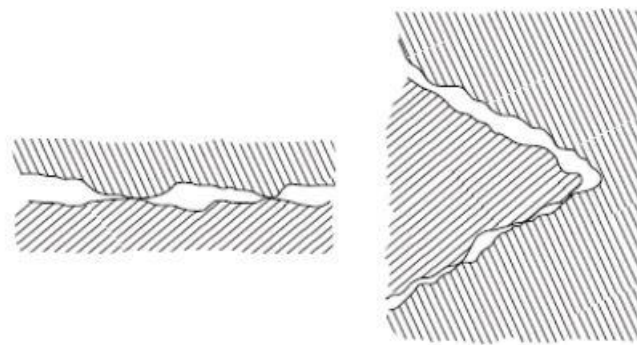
Visualizing imperfection in thread and contact surfaces (Blatt 2003) [1]
